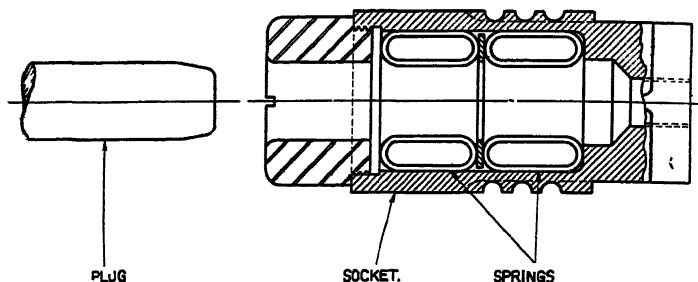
600 AMP. "GARTER SPRING" PLUGGING CONTACT
